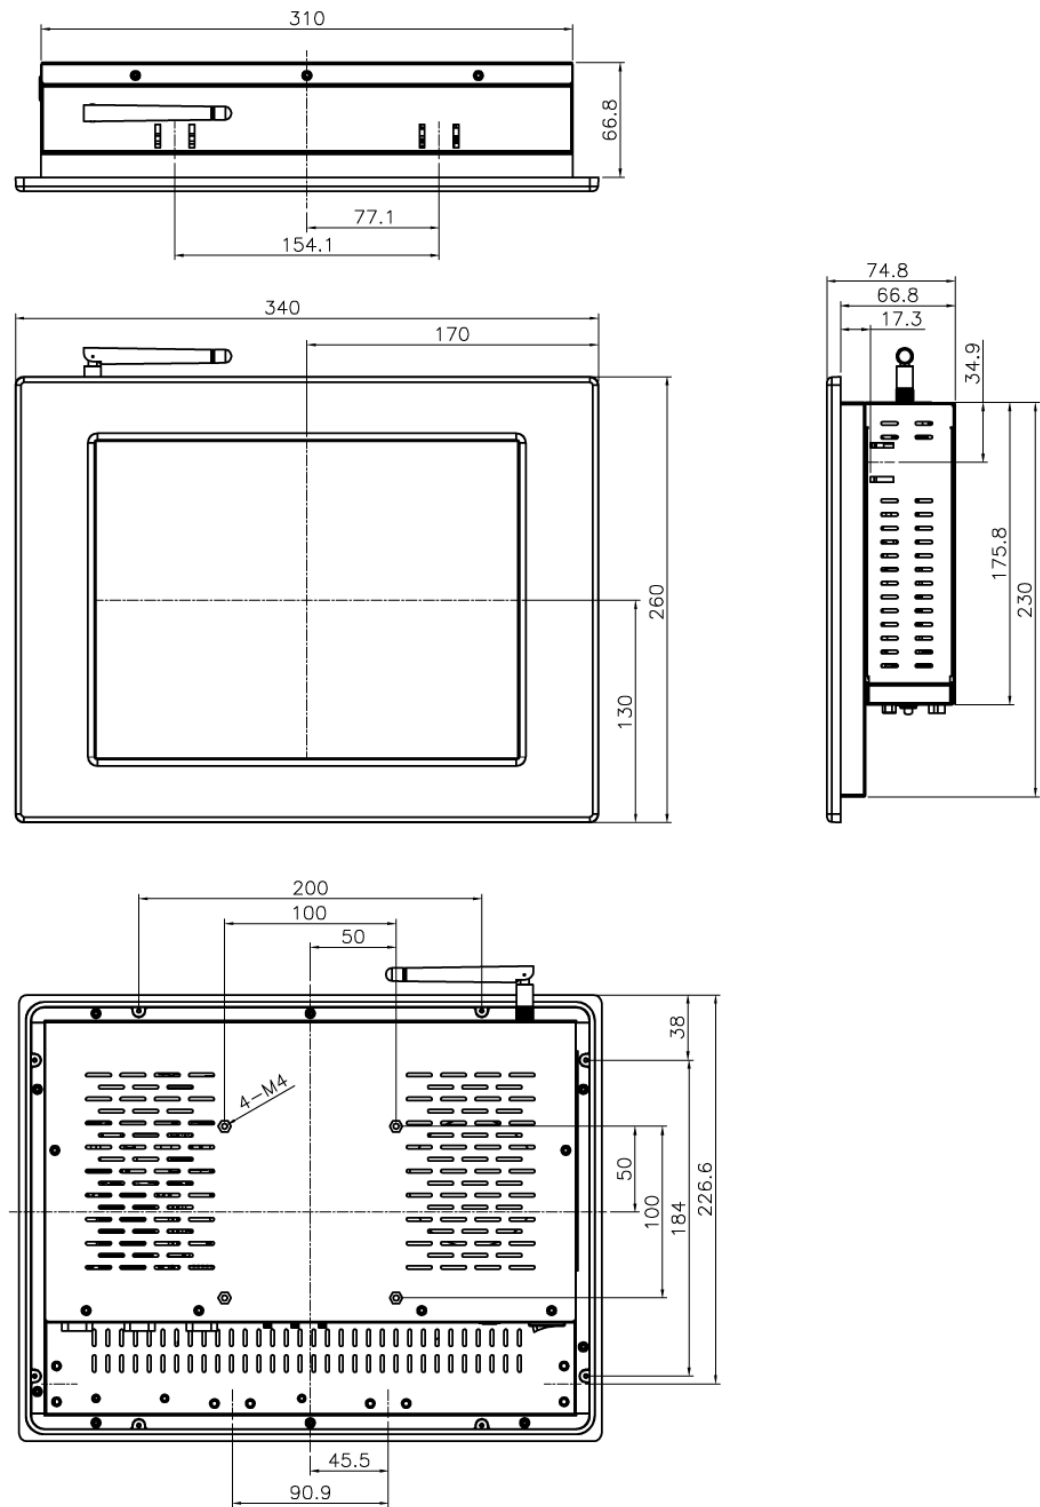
PPC-3712A-N26 Dimensions (mm)
